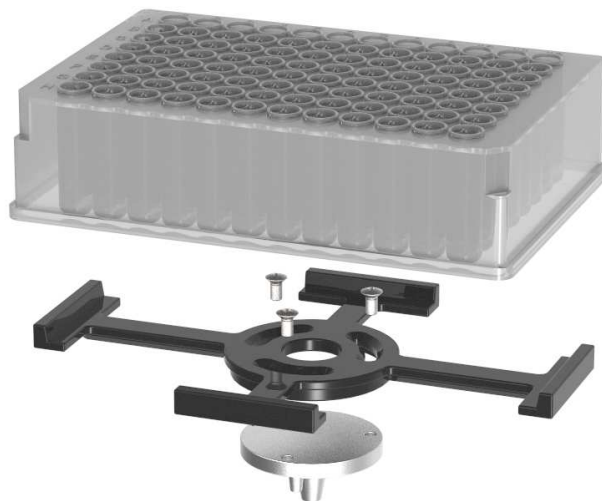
Schematic illustration of the construction works in order to transform the WXSS205DU DualRange balance unit into a stalagmometer in exploded view. The carrier holding a standard micro titer plate (96 deep well plate) is fixed onto the weighting pan by means of three M3 screws. The pan is fixed into the weighting cell which is not illustrated here.
